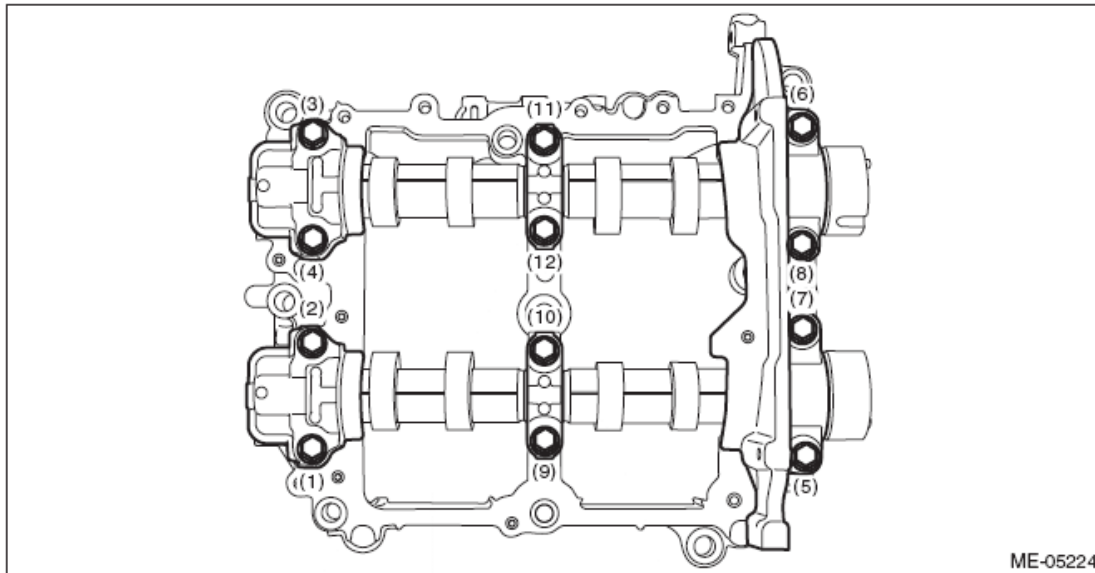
Identifying Camshaft Caps Bolts Tightening Sequence
